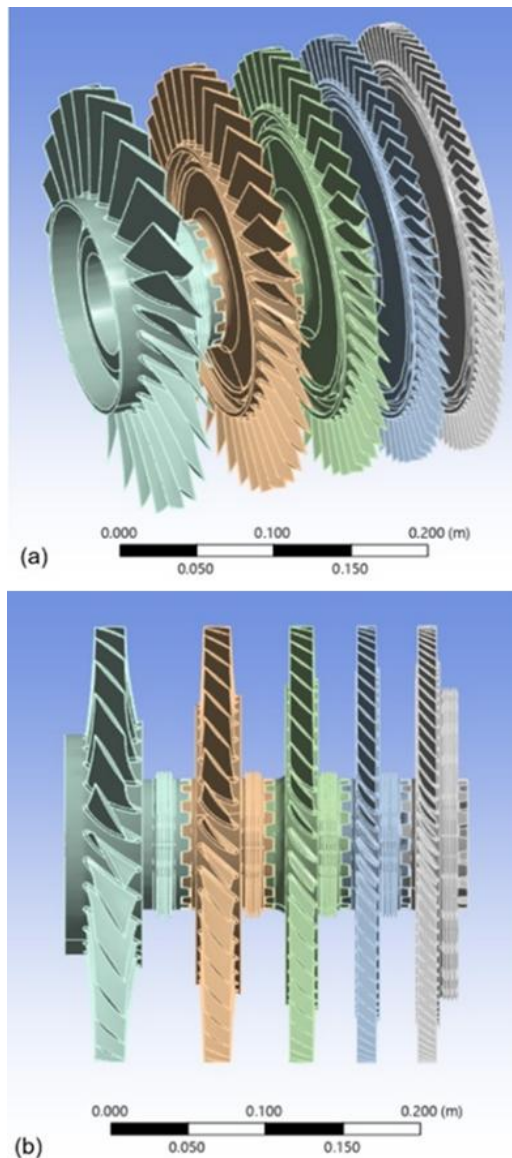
Blades and disks of a 5-stage axial compressor for a 5-kN thrust aeronautical gas turbine: (a) perspective view; (b) side view.
